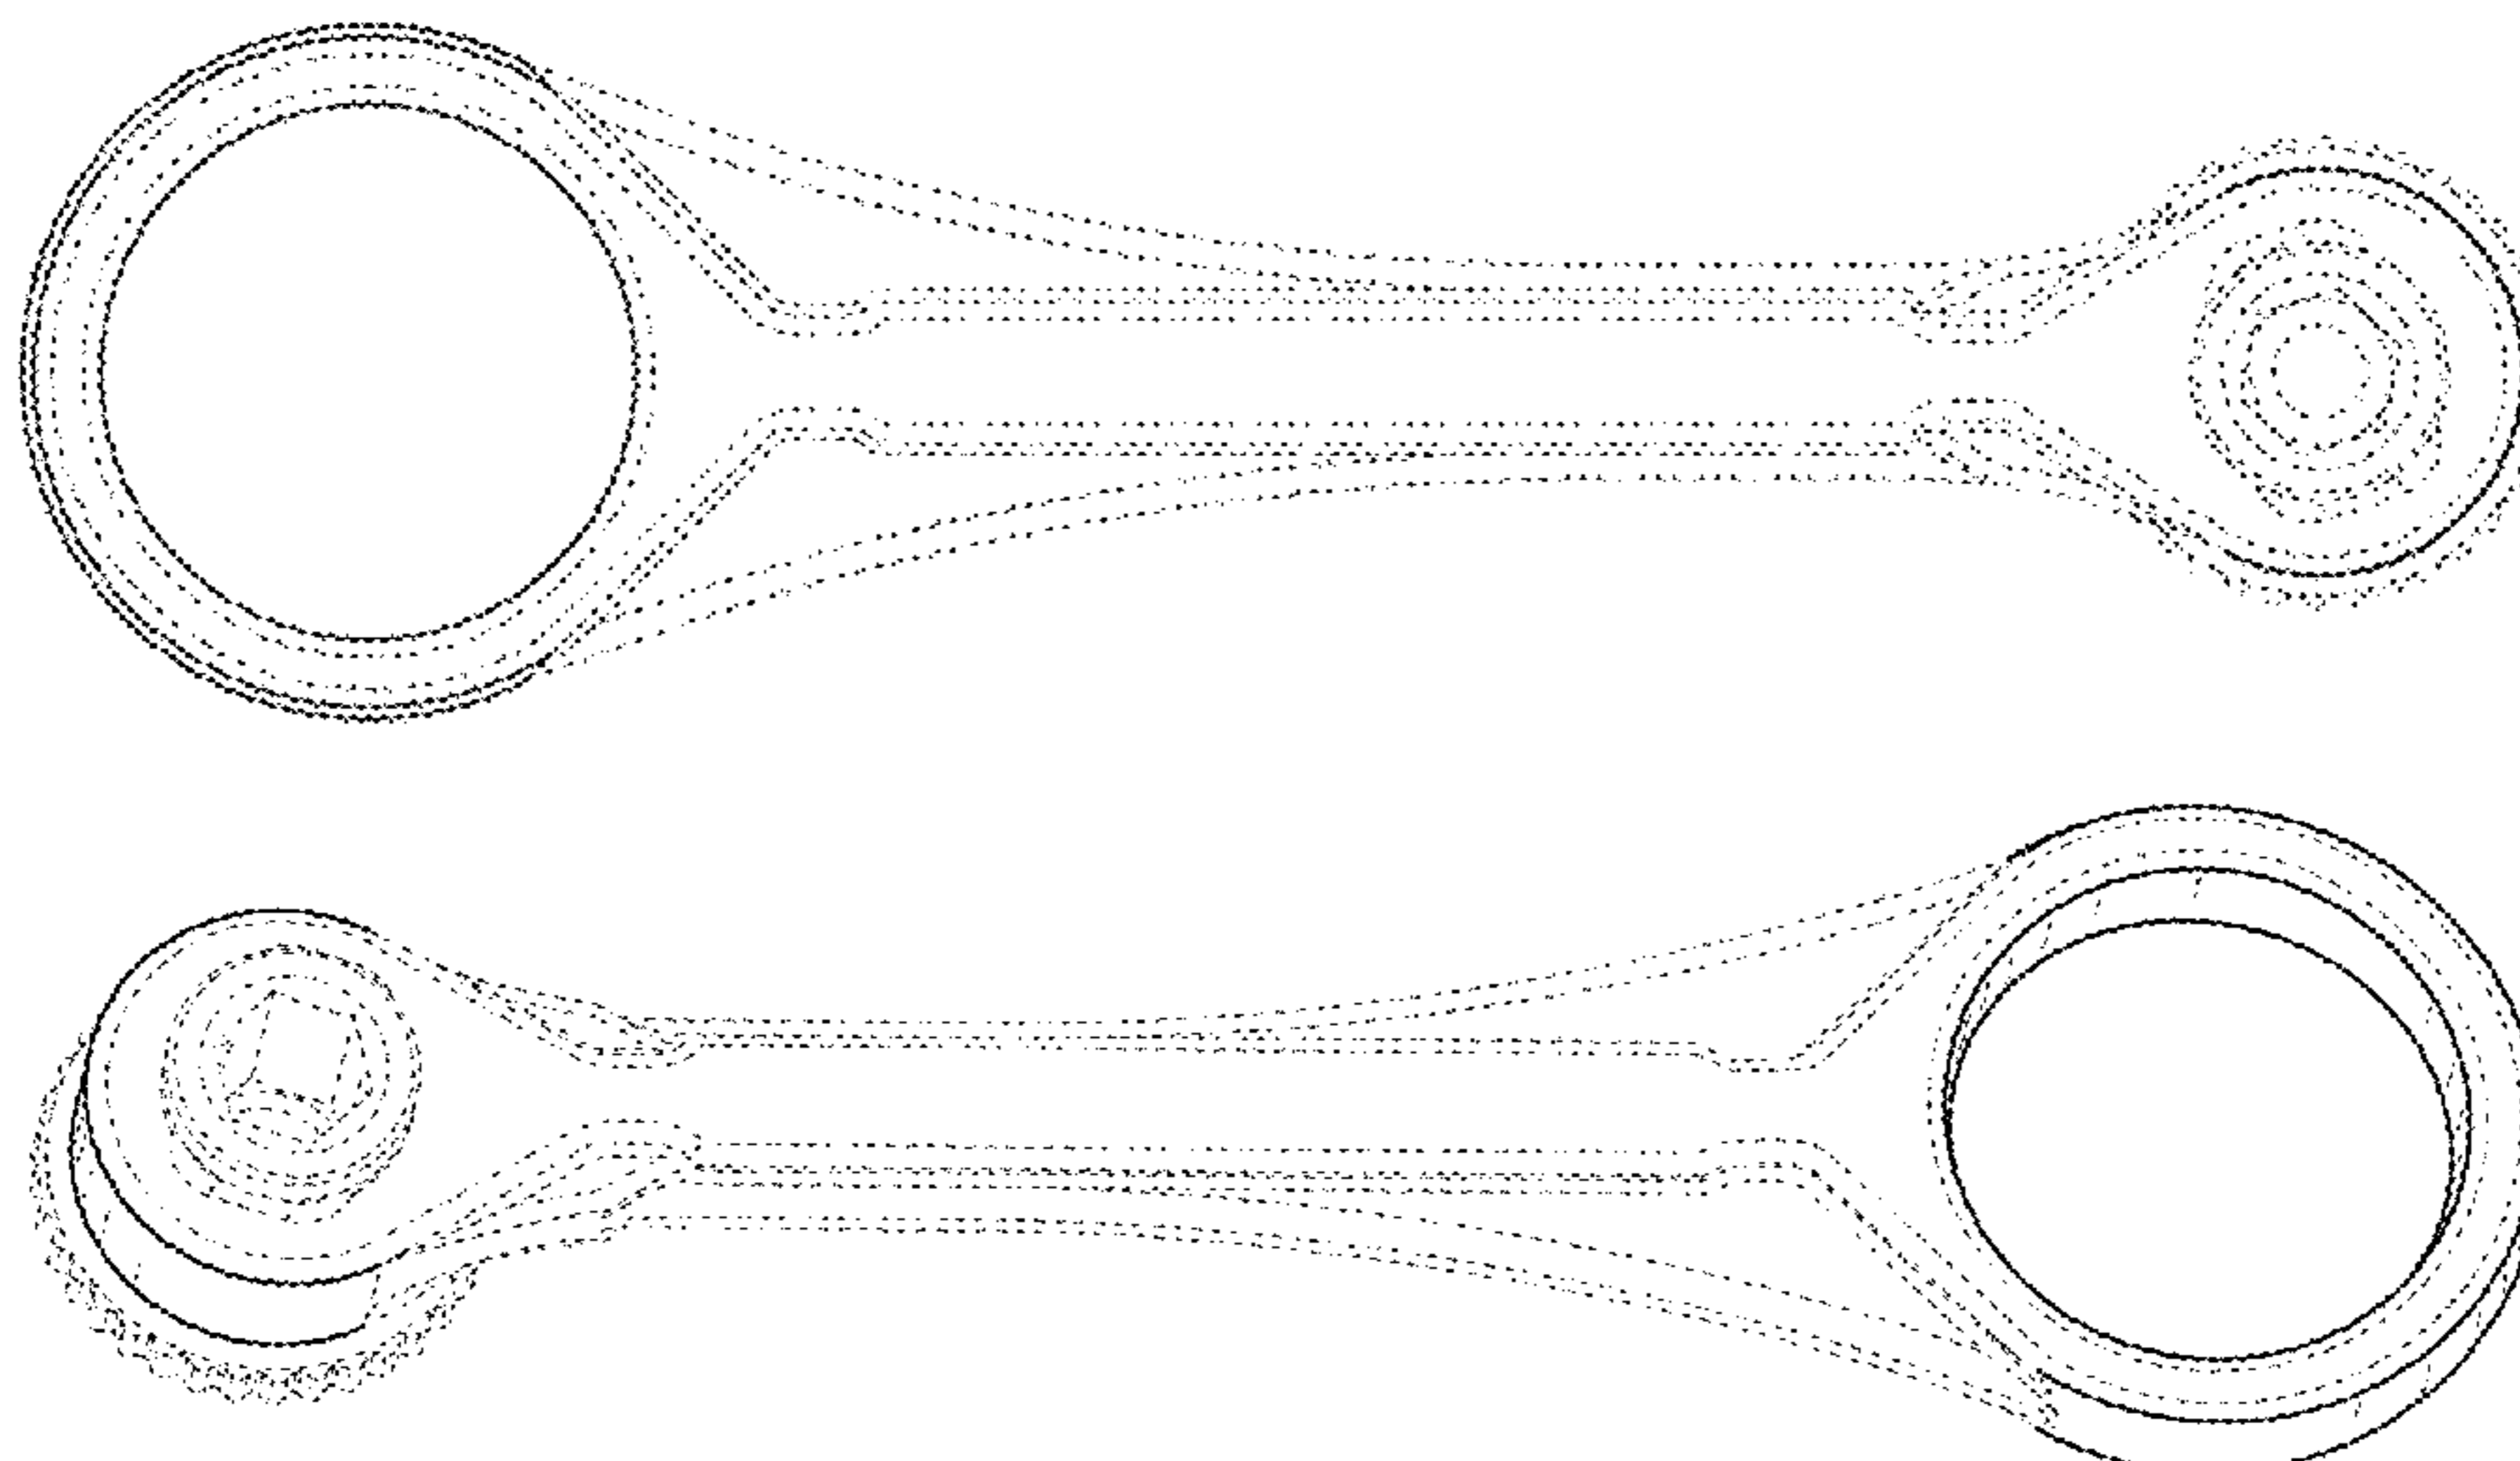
is a right side orthogonal view of the wrench shown in FIG. 1;
